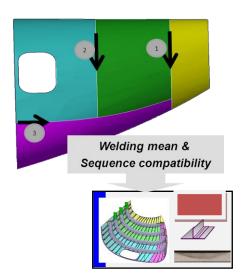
, intermediate Structure demonstrator, welding sequences.
